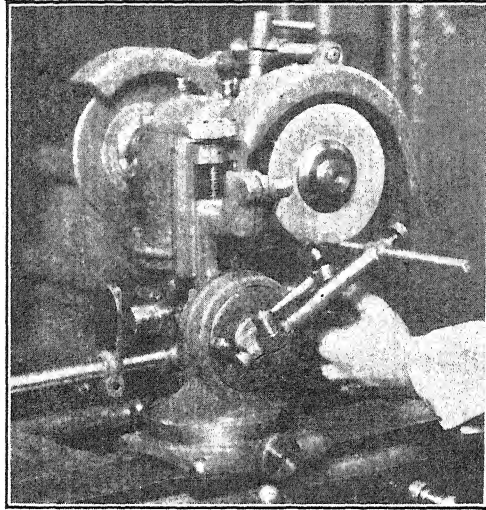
Grinding a Formed Cutter for Fluting Taps and Reamers on a Norton Universal Tool and Cutter Grinding Machine.
